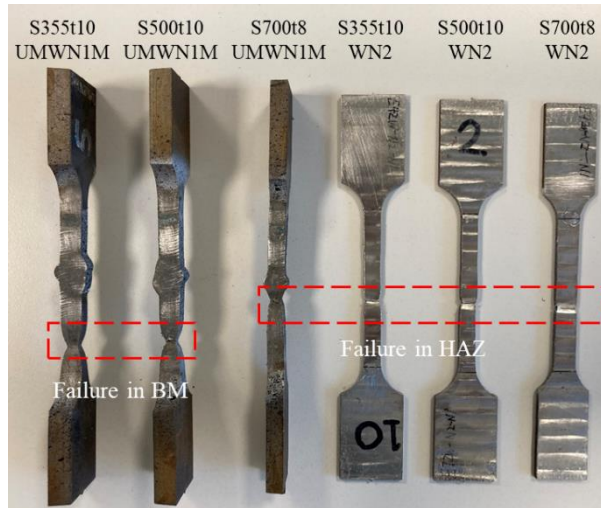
Failure of milled and unmilled welded coupon specimens.
